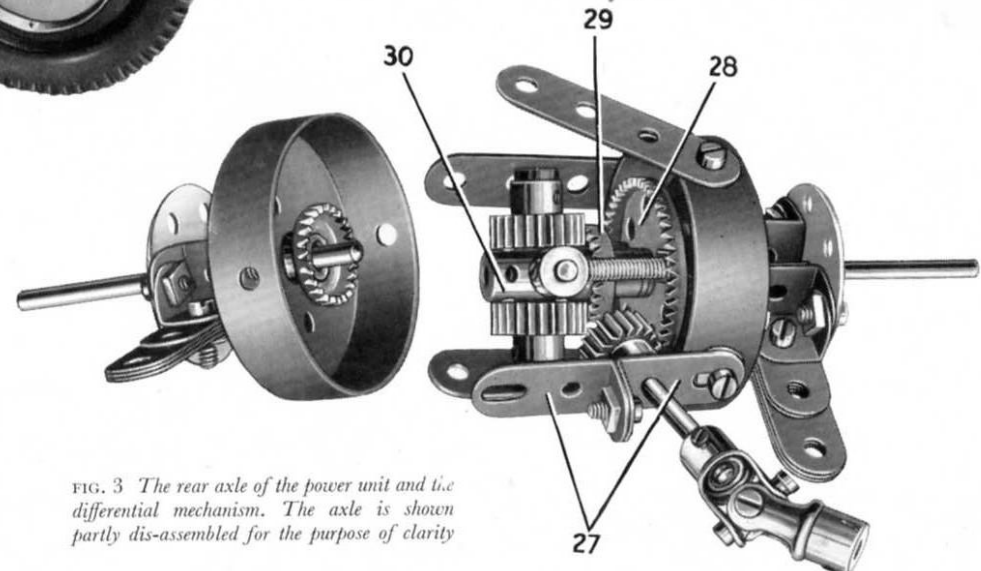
The rear axle of the power unit and the differential mechanism. The axle is shown partly dis-assembled for the purpose of clarity
